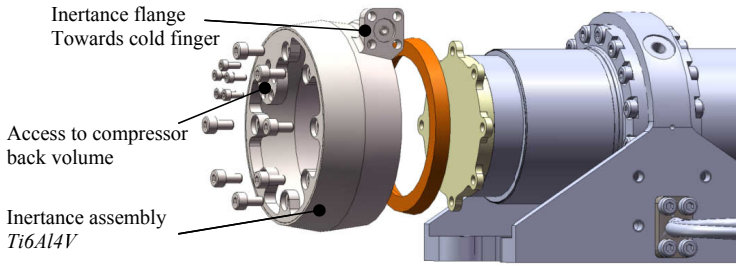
Mounting of the inertia assembly to one MPTC compressor half side.
